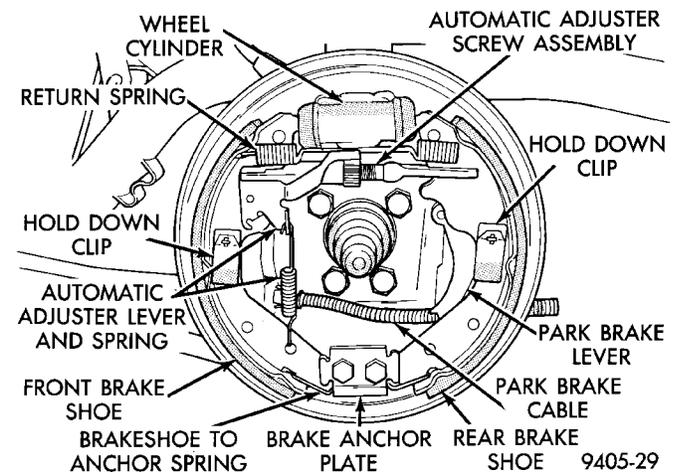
Kelsey Hayes Rear Wheel Brake Assembly (Left Side Shown)
